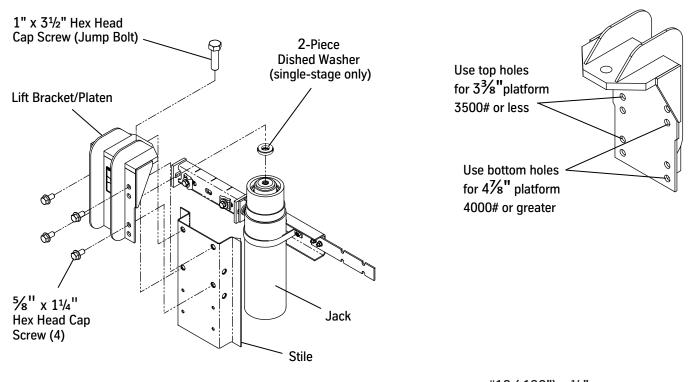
Lift Bracket/Platen Assembly Mounting on Stile and Jack
